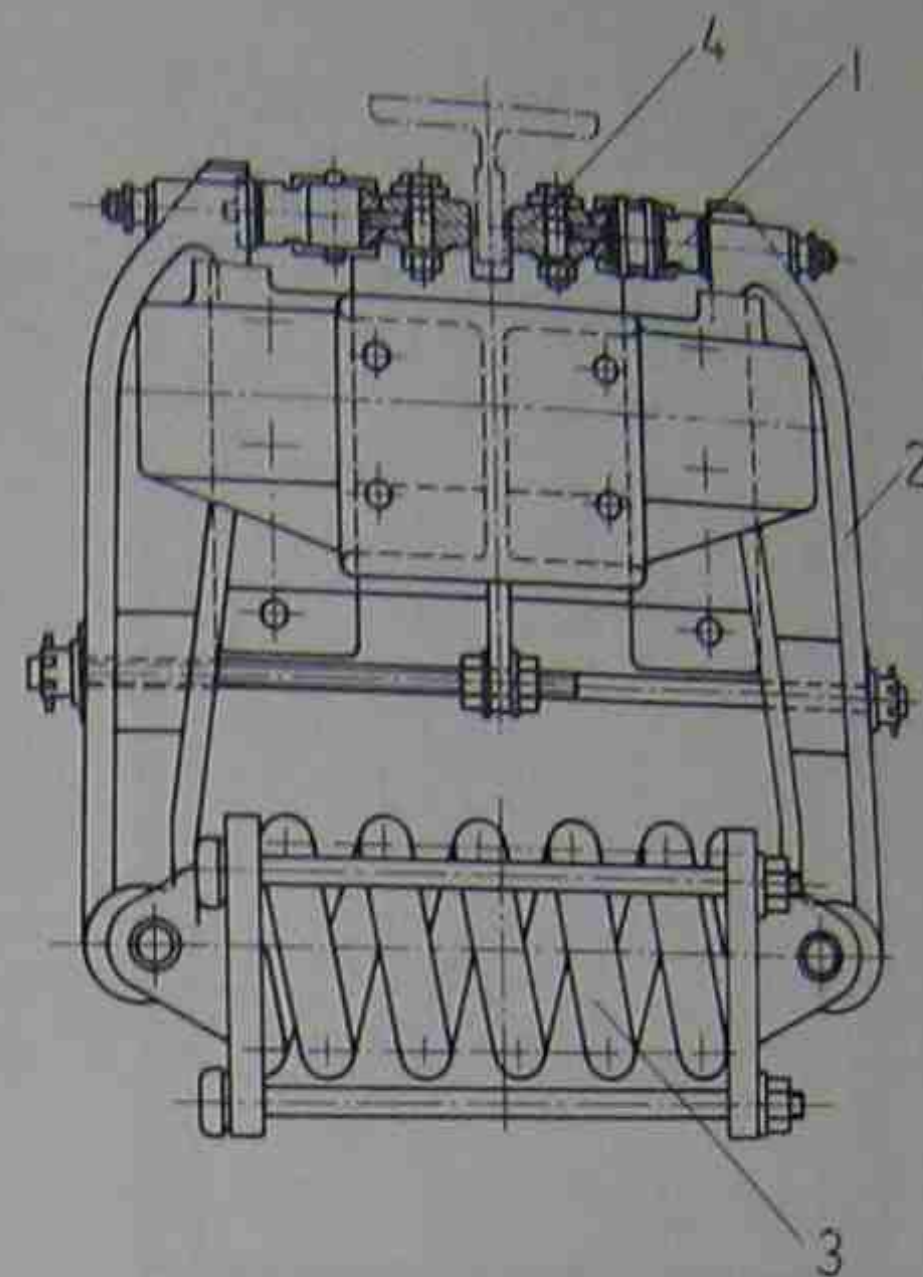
Rocker arms and equalizing spring of flexible guide clamp safety gear. 1. Jaws; 2. Rocker arms; 3. Equalizing spring; 4. Gibs.
